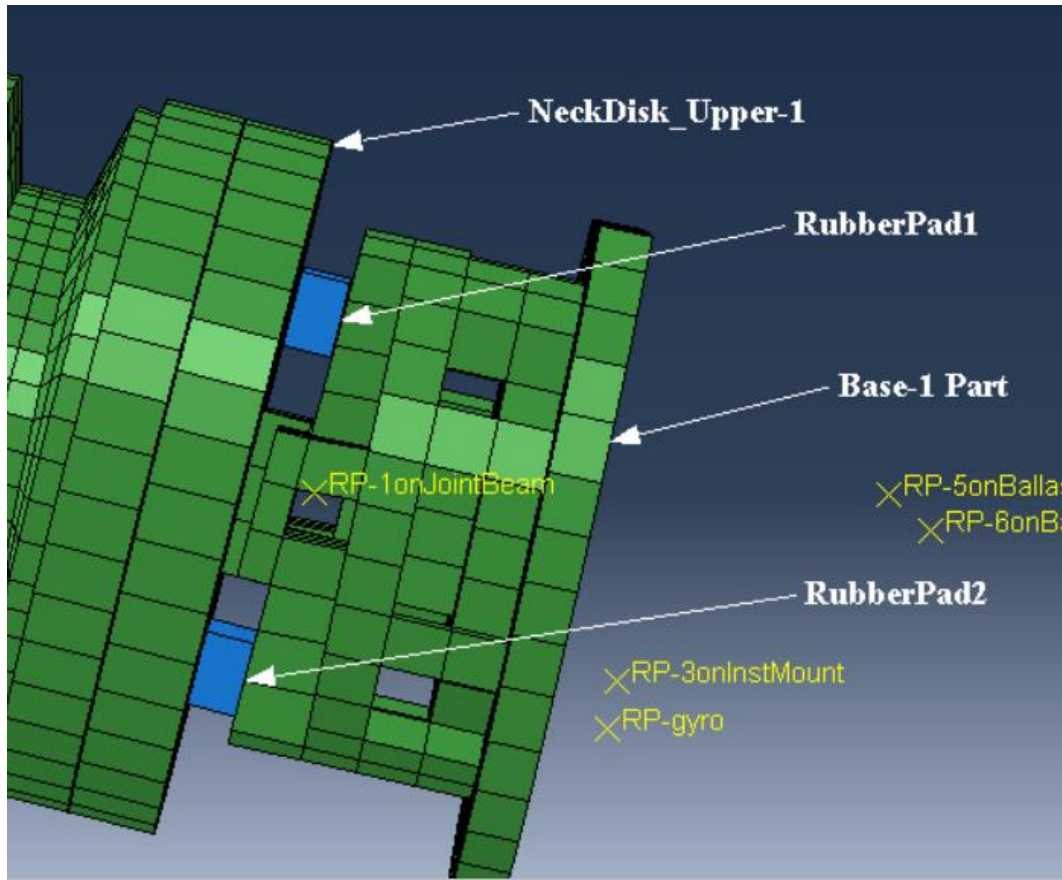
Zoomed Section Shows Where RubberPad1 and RubberPad2 Are Located
